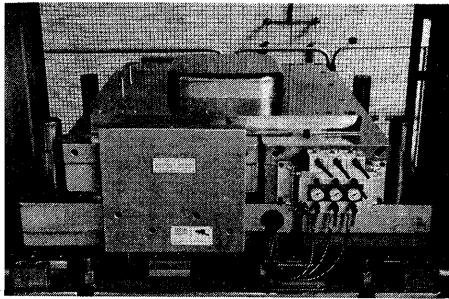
Tool build-in in the press with in front the pressure control unit of the gas cylinders
